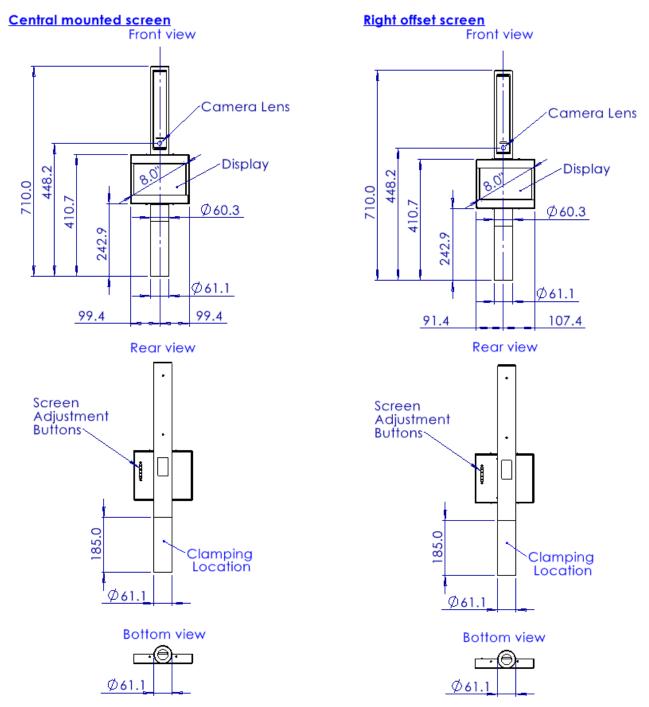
Dimensional drawings of central mounted and right offset ASLOCs with 8" Displays
